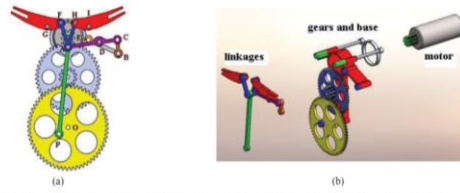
(a) FBL with Evans straight line mechanism assembly; (b) Exploded view of mechanism
